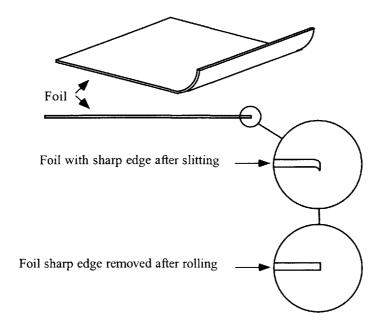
Copper Foil with the Burr Removed After Rolling.
